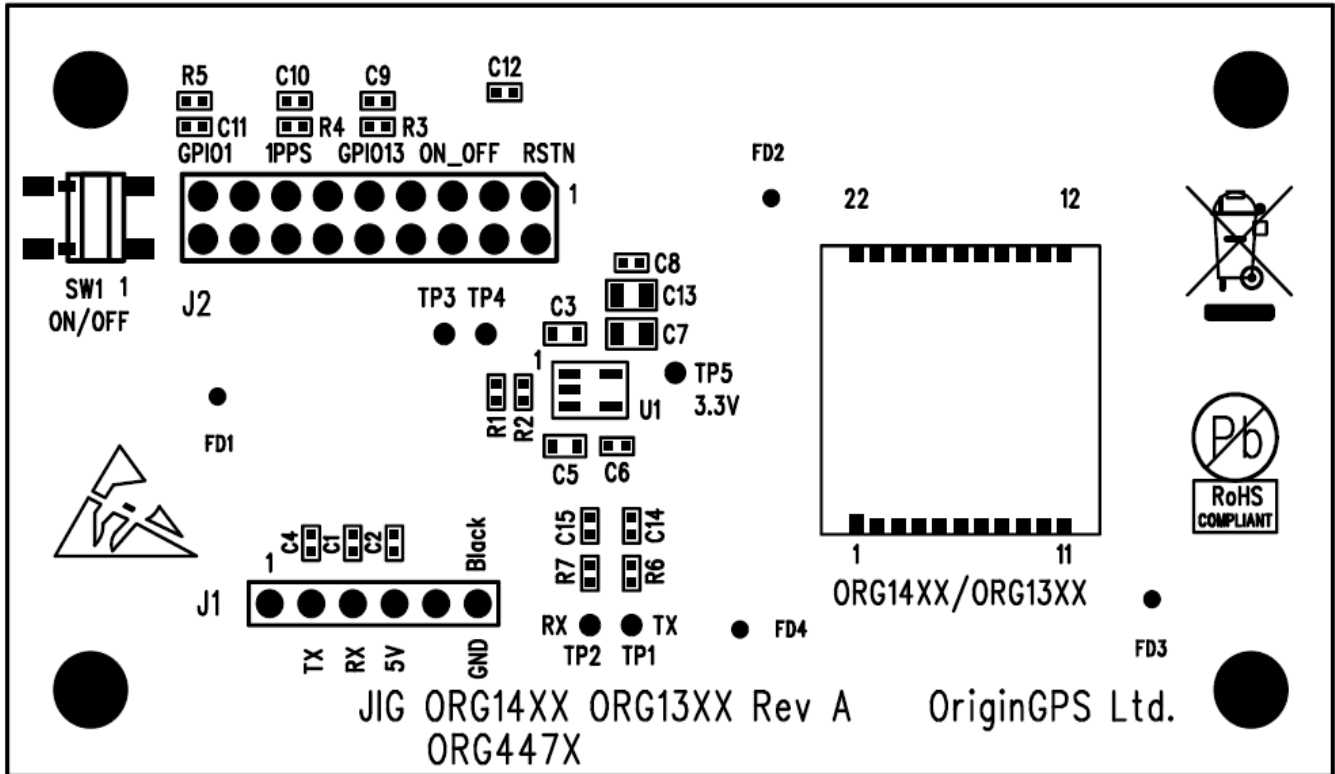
MAIN BOARD COMPONENTS PLACEMENT
